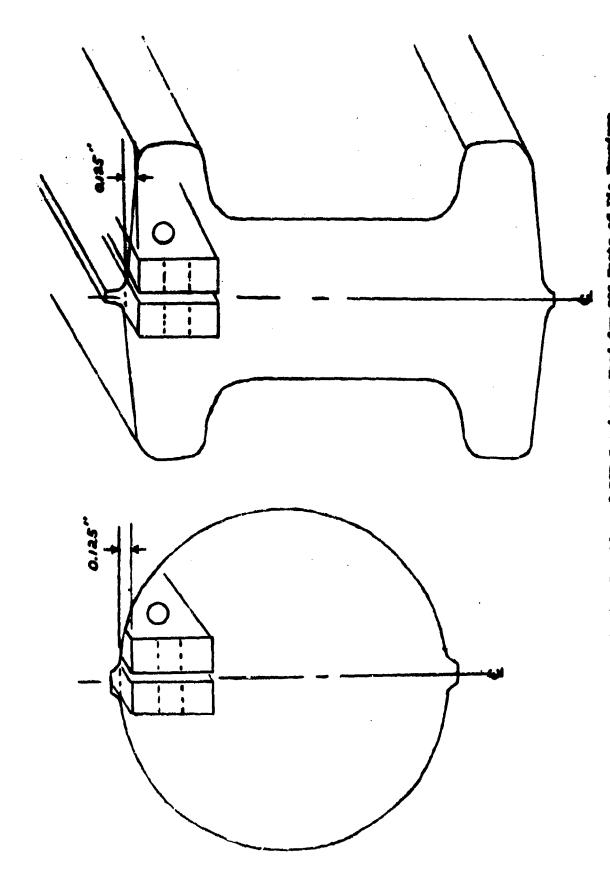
Configuration of Double Cantilever Beam (DCB) Specimen Used for SCC Tests
